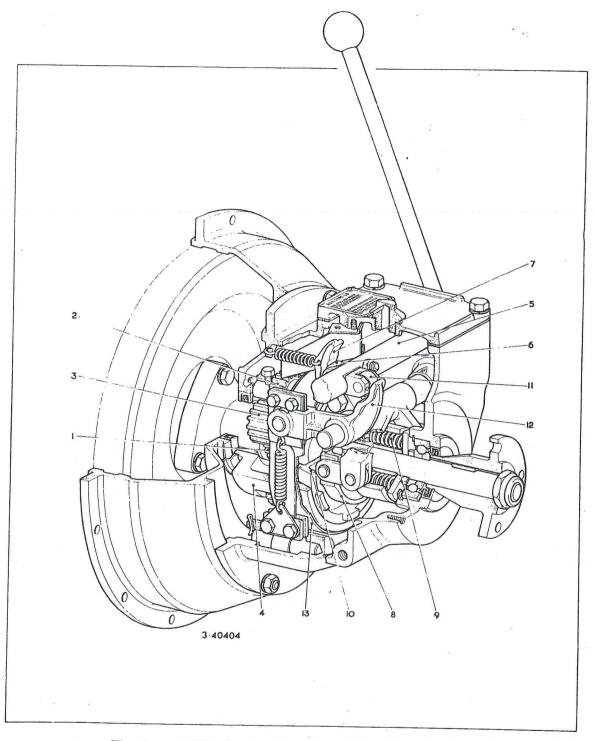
LISTER REVERSE GEAR—Manually Operated
